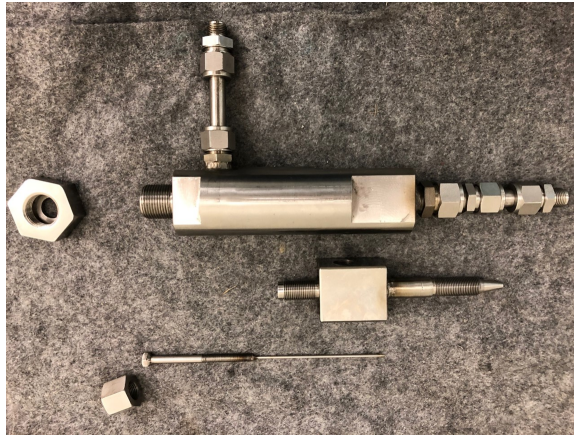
CO<sub>2</sub> ejector with clean welds and tapped threads.
